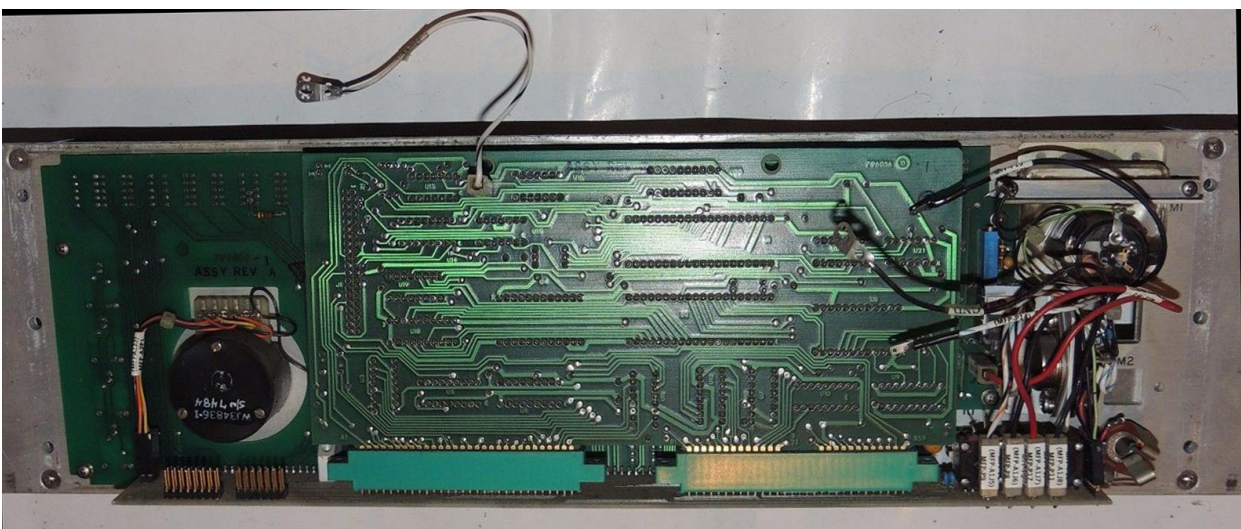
The MFP-A1A1 Card already inserted into the MFP-A1 Small Motherboard of a MFP Front Panel Assembly, please notice also the MFP-P21 and the MFP-P11 Ground jumpers.
